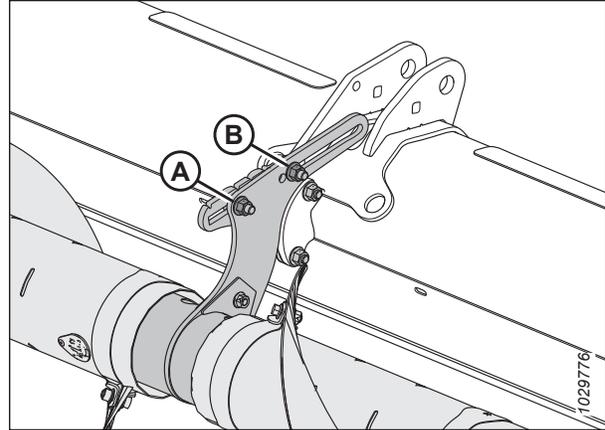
Initial Position of Adjustable Mounts – Two-Piece Auger
